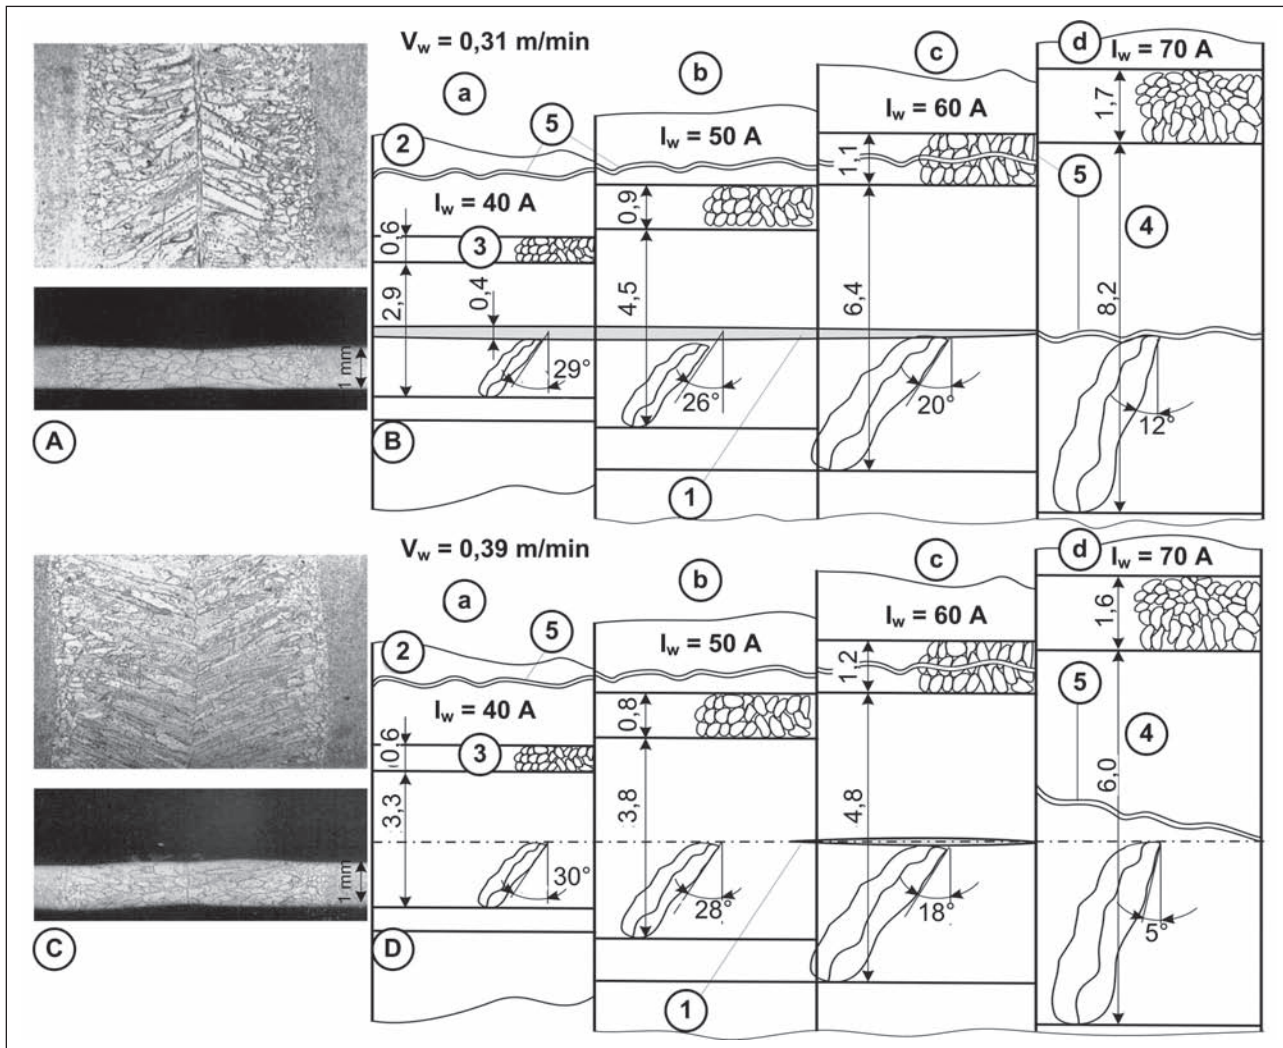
Top and side of view of weld macrograph (A → 40 A, 0,31 m/min, C → 50 A, 0,39 m/min) and B) and D) (4) BWJ showing widths of weld and (3) HAZ, (5) location of fracture in tensile testing, grain size and shape in weld and (1) location of intermediate layer of independent grains, at different welding currents (a-d)
